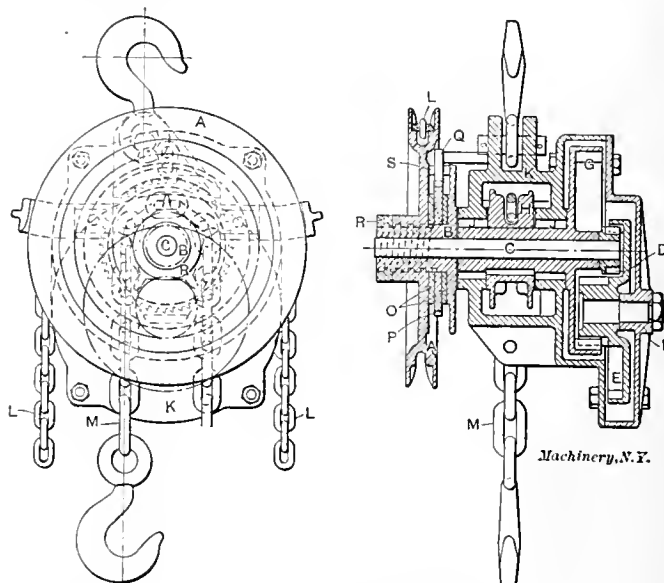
Elevation and Section showing Gearing and Automatic Brake.
